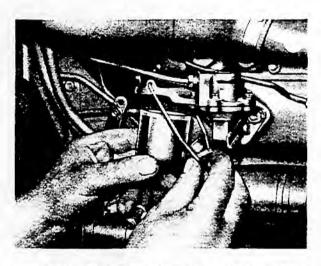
REMOVING SEDIMENT BOWL FROM FUEL LIFT PUMP.
